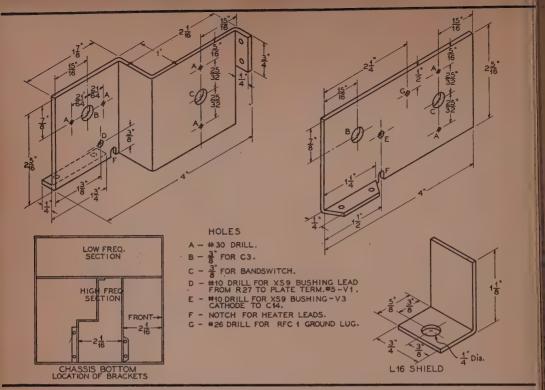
Dimensions for the bandswitch brackets and the L16 shield. The switch should be mounted on the brackets before installing the latter, as shown at lower left.
